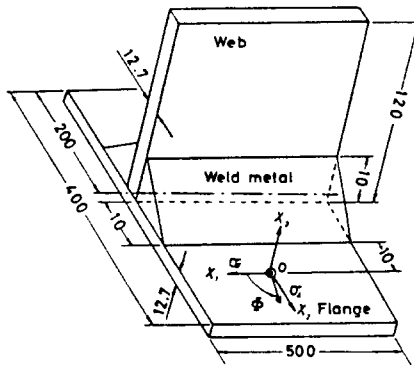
Details of fillet welded joint (0 : measured point)
